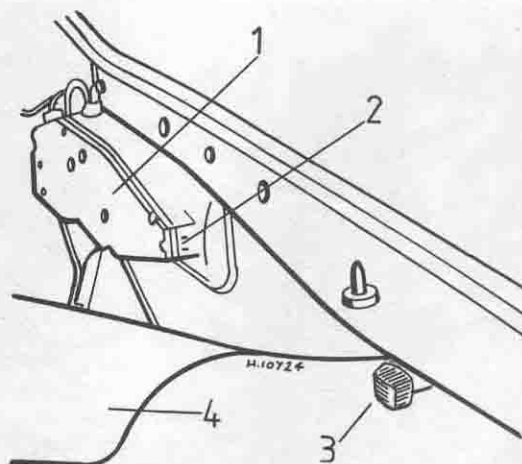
Rear lamp assembly (Coupe and Spider) (Sec 25)
